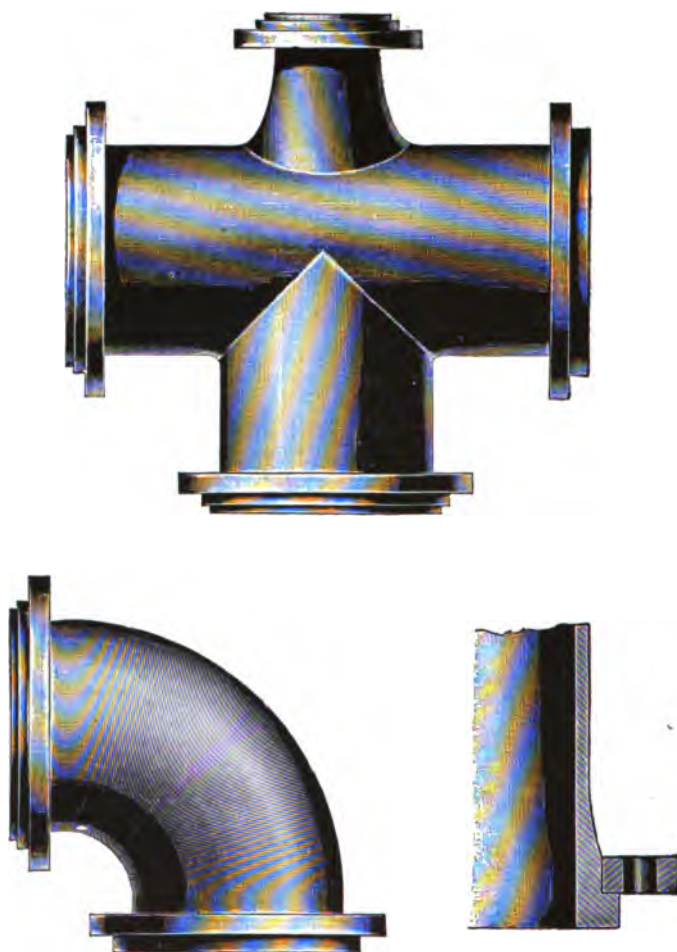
Welded Steel Fittings with loose flanges.
